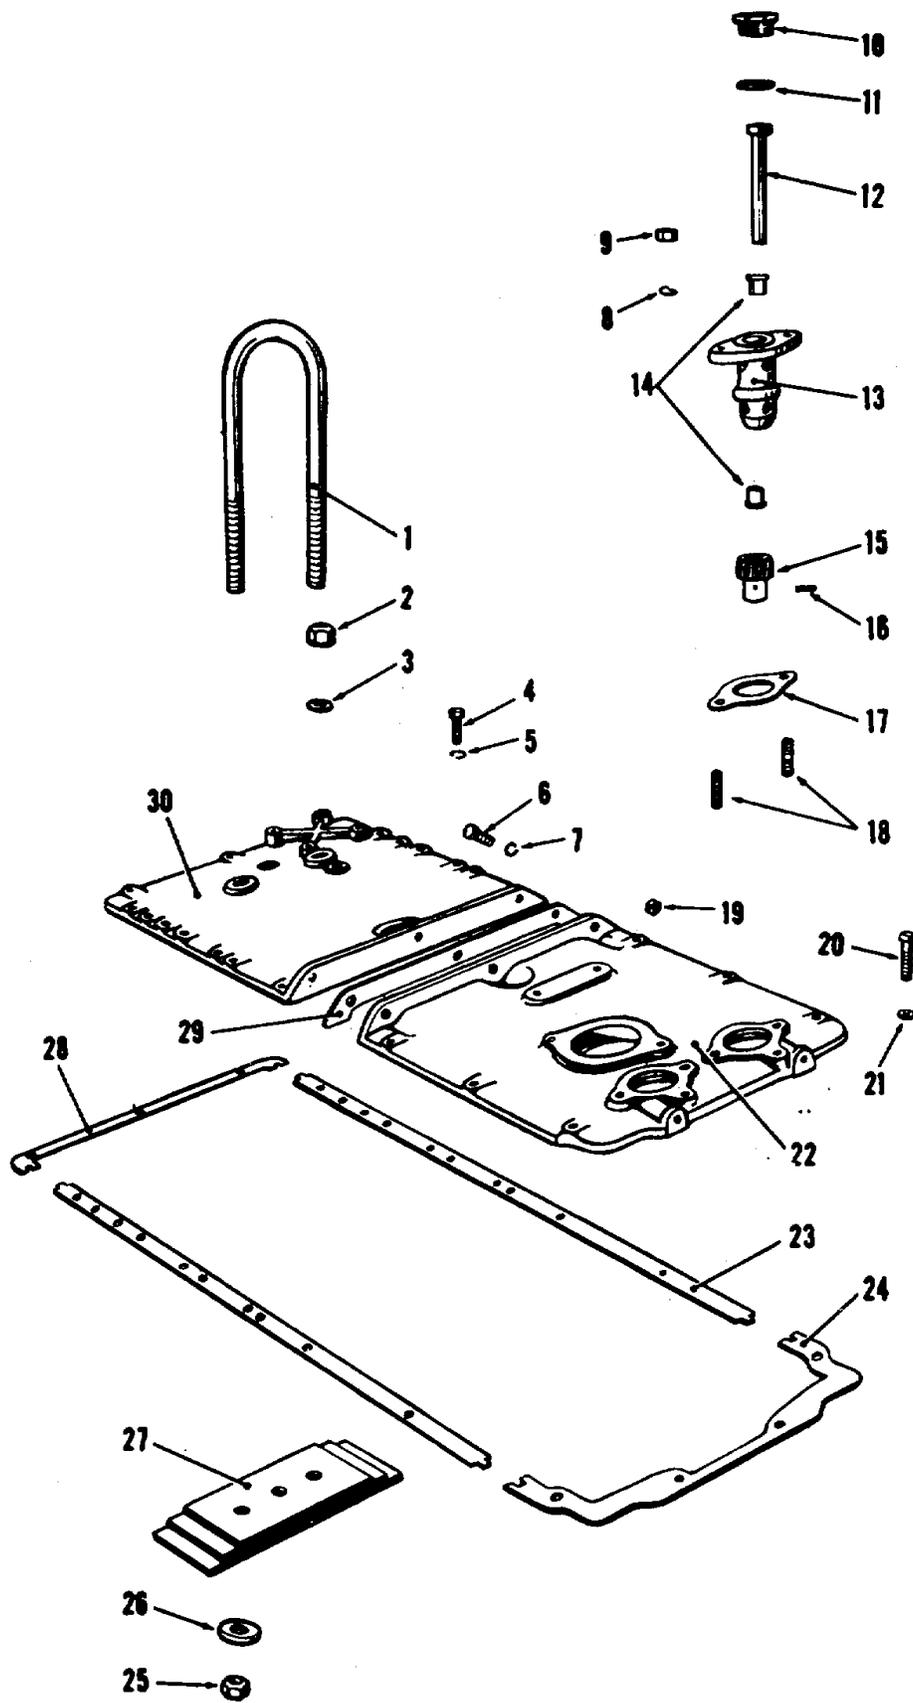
Exploded view of Crankcase covers, lifting bail, and tachometer drive.
